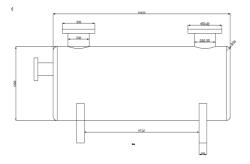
DIMENSIONS OF FLATE HEAD PRESSURE VESSEL
